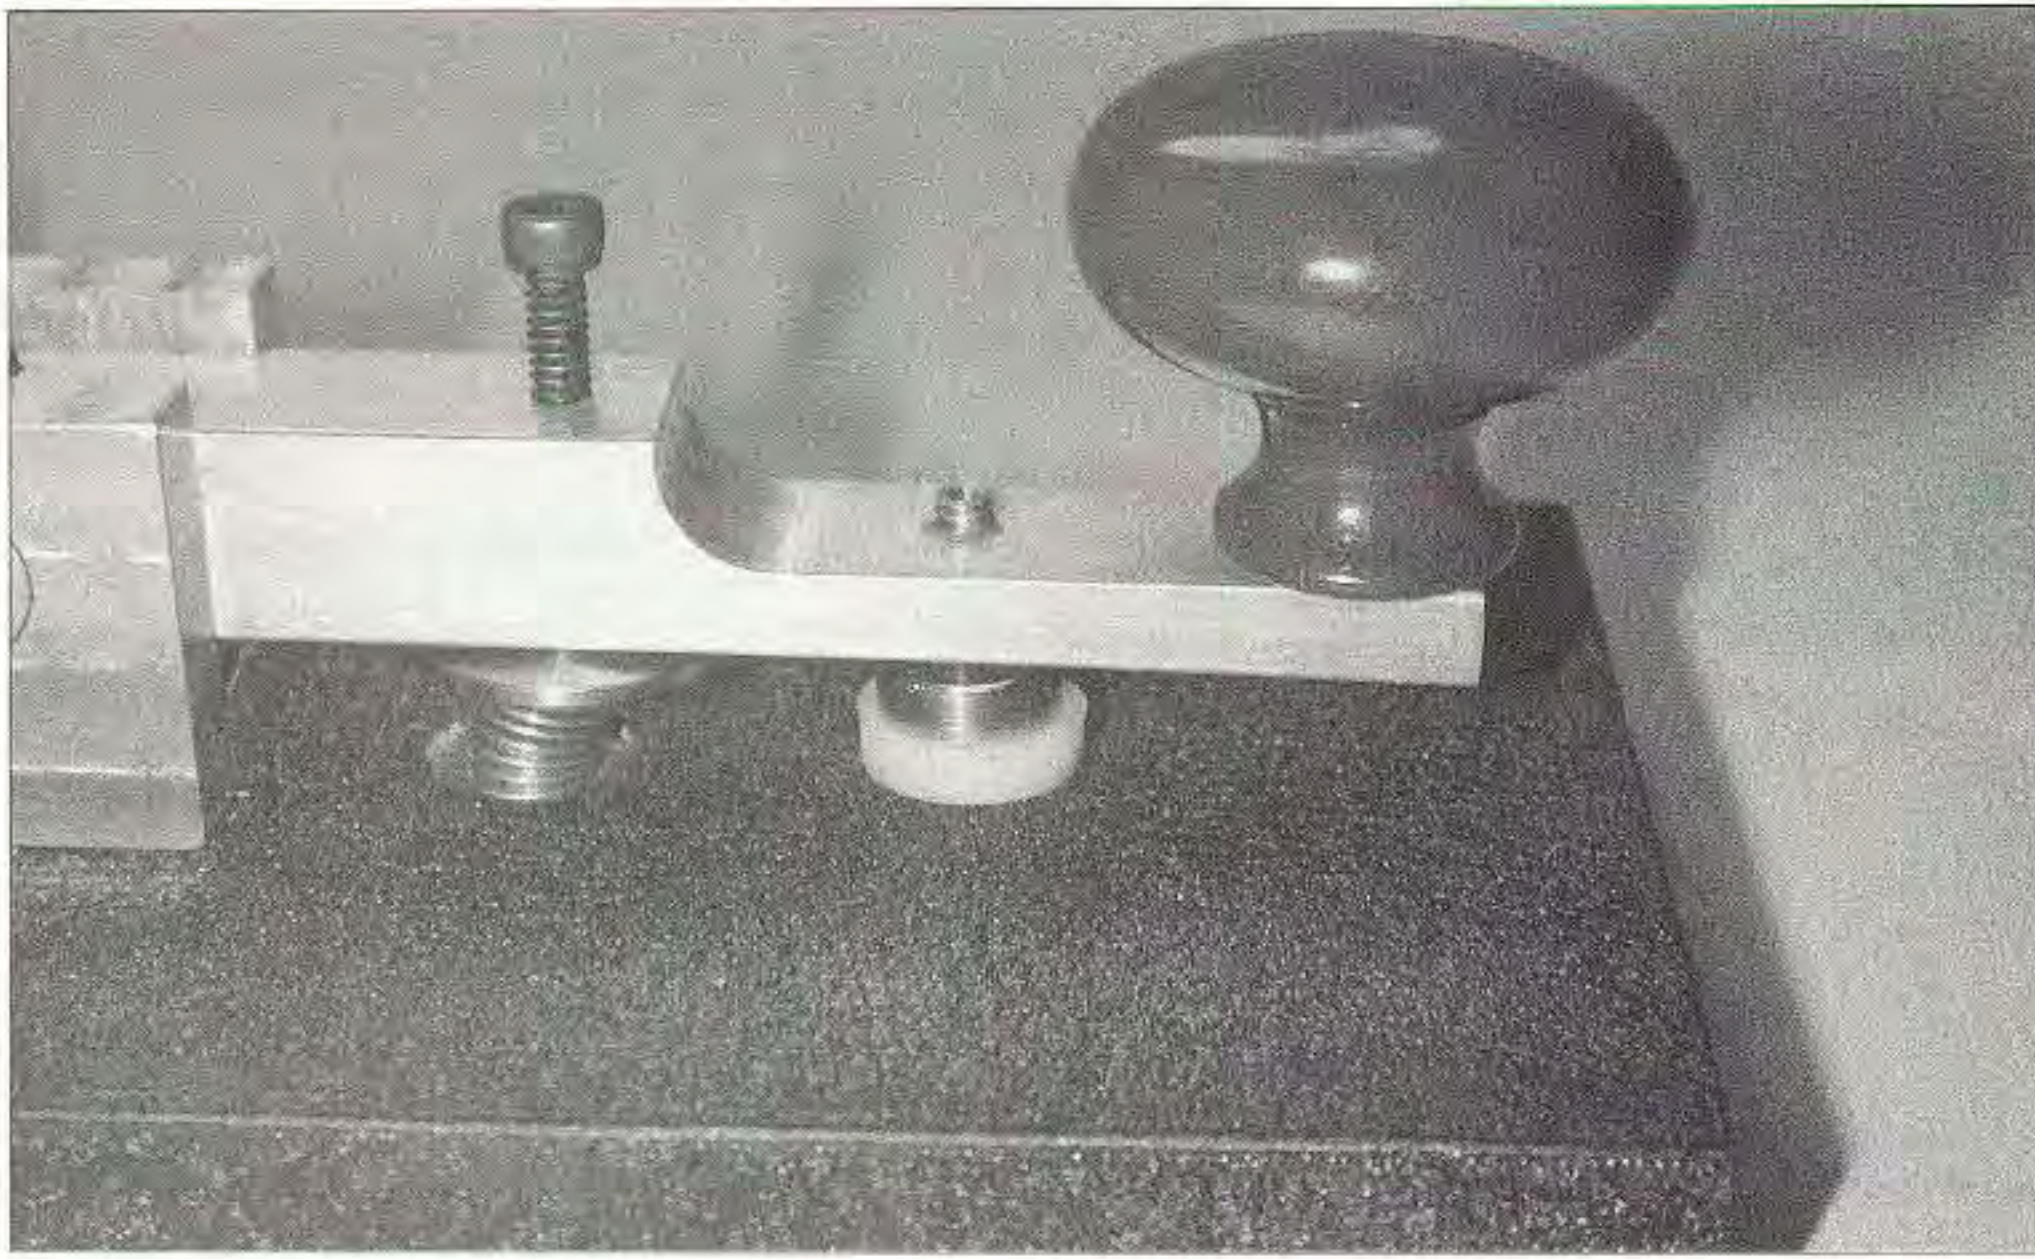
Photo I. The knob is a drawer pull. The upper contact is a cone-pointed set screw.
